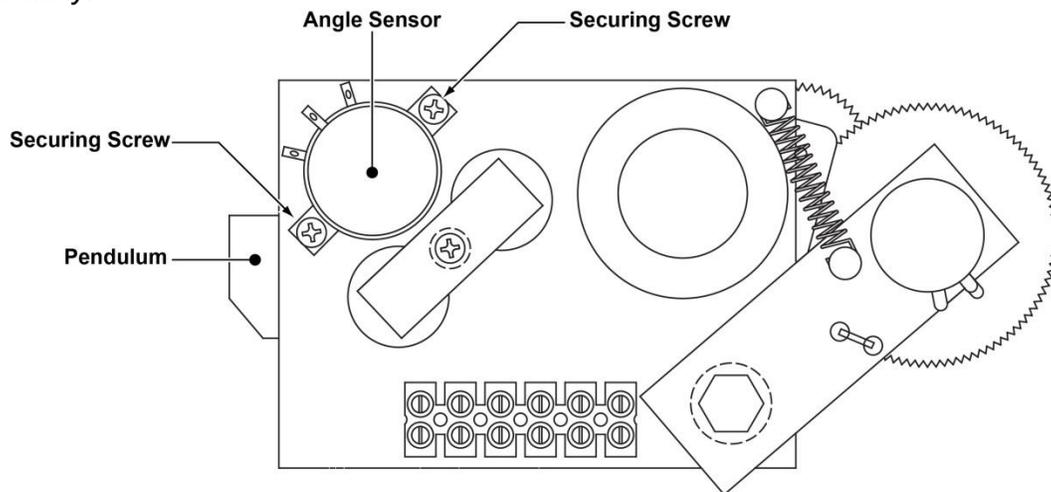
SENSOR BASEPLATE ASSEMBLY
